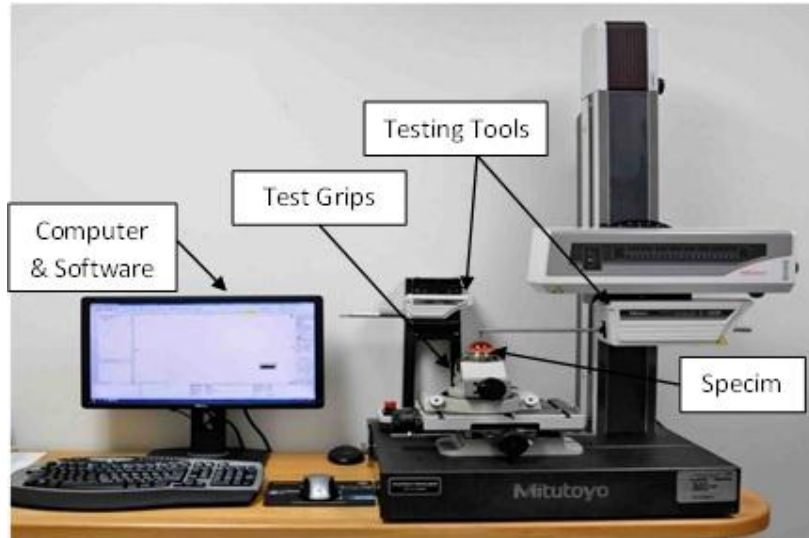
Surface Roughness Testing Machine Type Mitutoyo.
